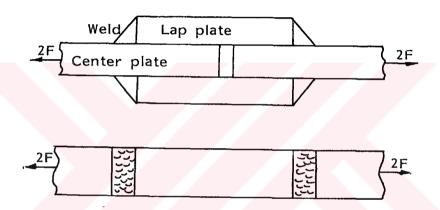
A transverse fillet weld lap joint investigated
